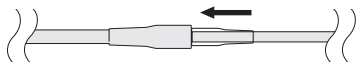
Sliding the strain-relief sleeve onto the connector pin.
